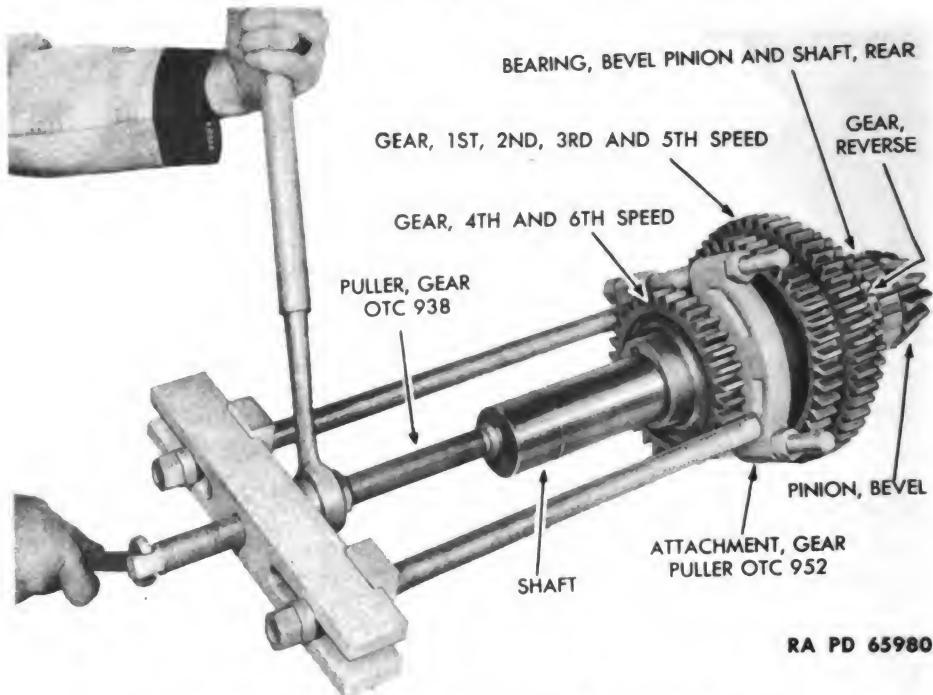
Removal of Gears from Bevel Pinion and Shaft
